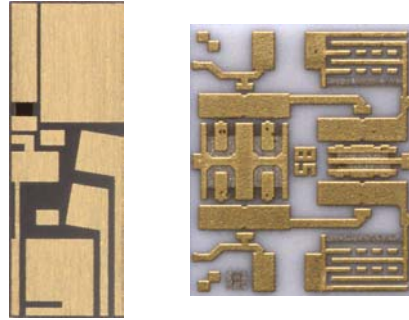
Example of a conductor pattern with special routing for externally mounting components.
